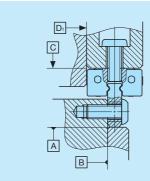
Reference mounting surface and general mounting structure ② of LWL1··· Y
